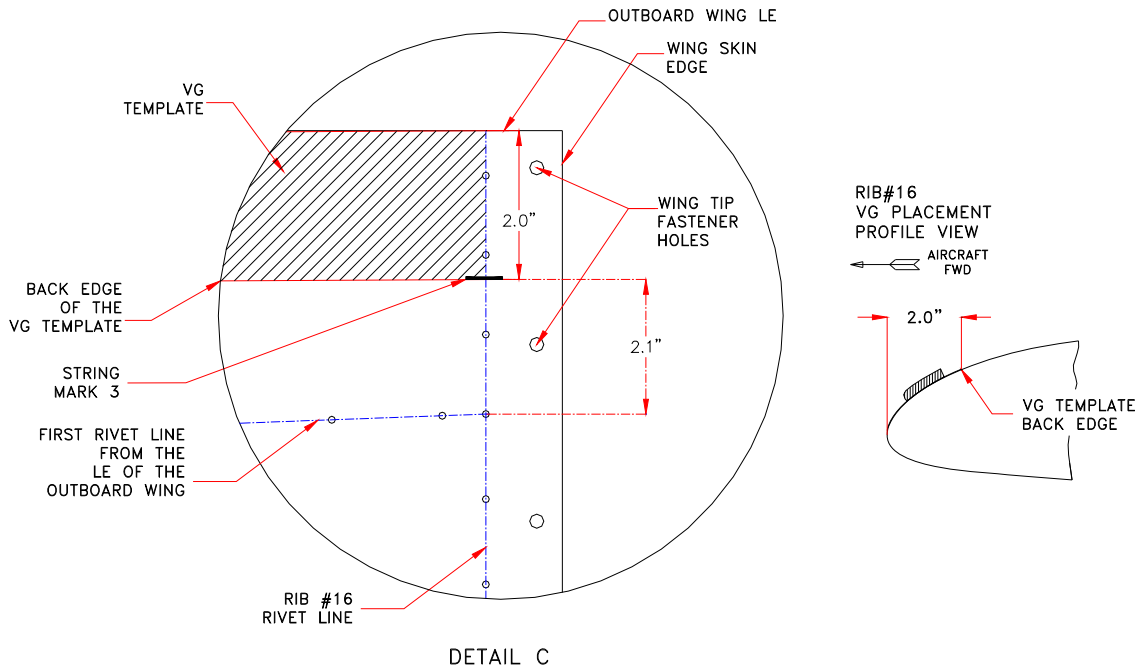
(Sheet 3 of 3): VG Installation – Detail C
